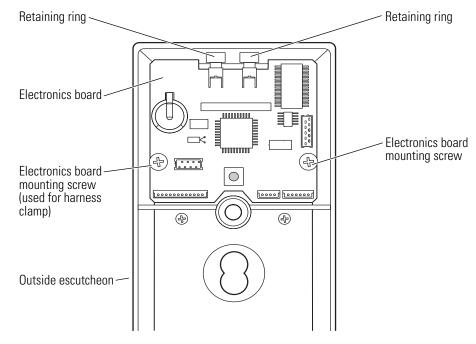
Removing and reinstalling the B.A.S.I.S. smart card control electronics board
